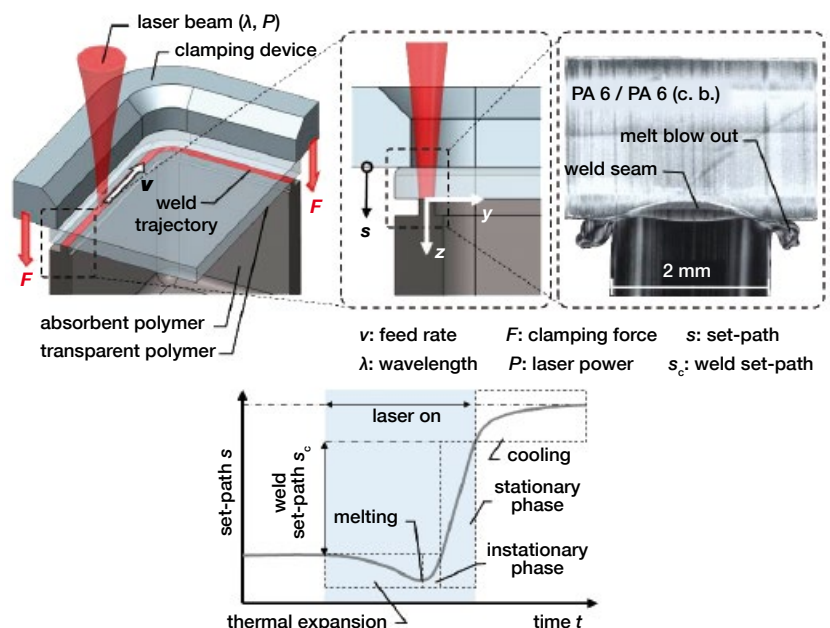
Process principle of quasi-simultaneous laser transmission welding (left hand, top), a typical weld seam of PA 6 (right hand, top) and a sketch of the measured set-path  $s$  during welding (bottom).
